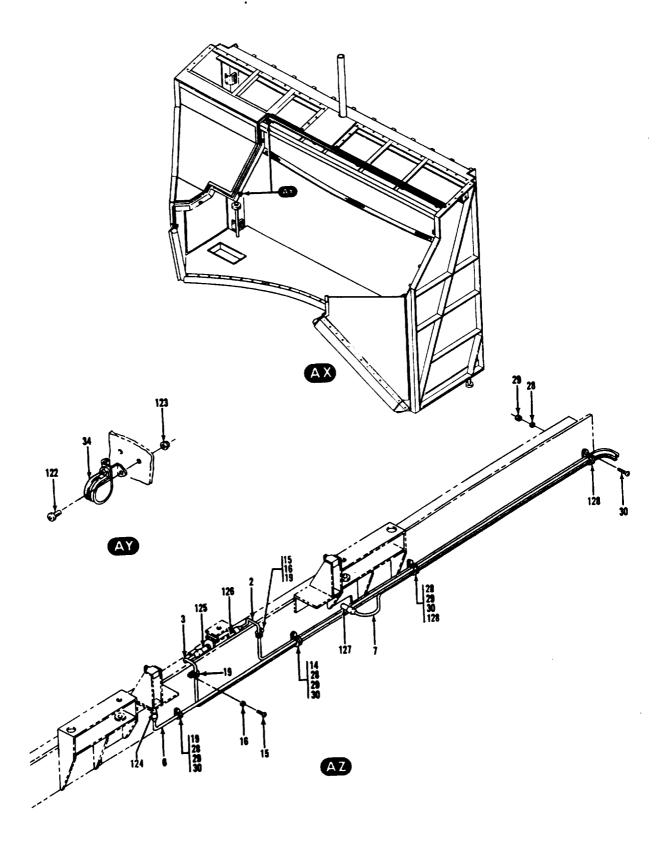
Electrical Equipment Installation (Sheet 16 of 19)
